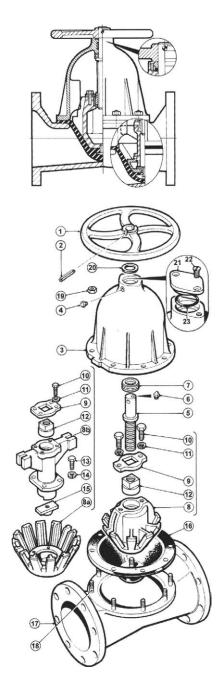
A typical lined weir type diaphragm valve *Courtesy of Richter Chemie-Technik GmbH
